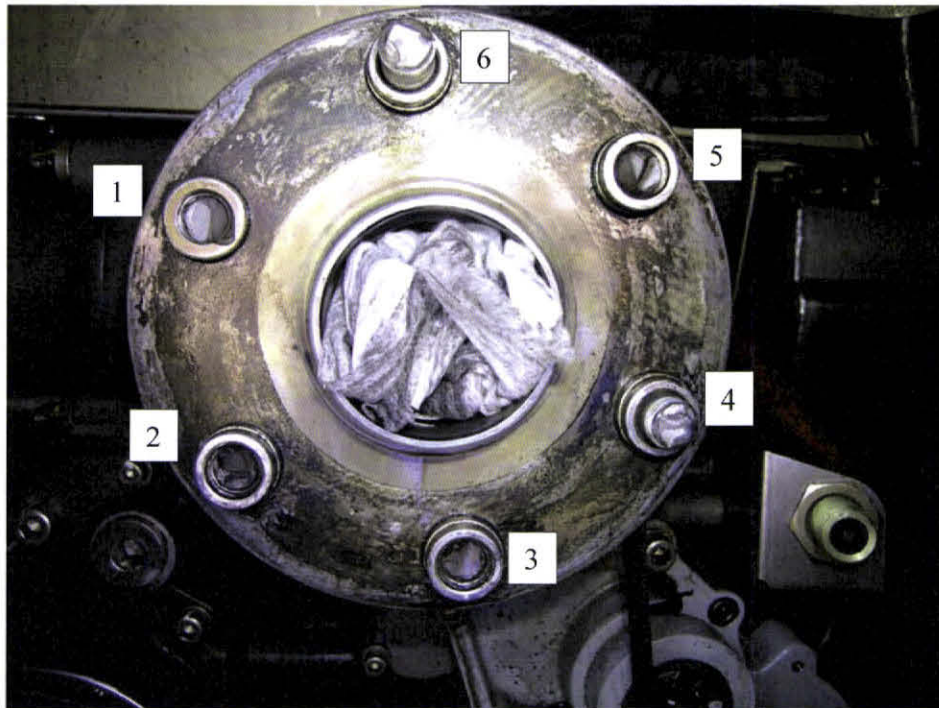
Picture of fractured bolts still mounted on the aircraft. Picture from AIBN.
